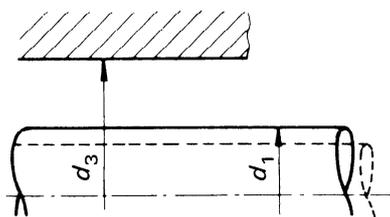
Unbalanced mechanical seal or soft packing with or without sleeve
